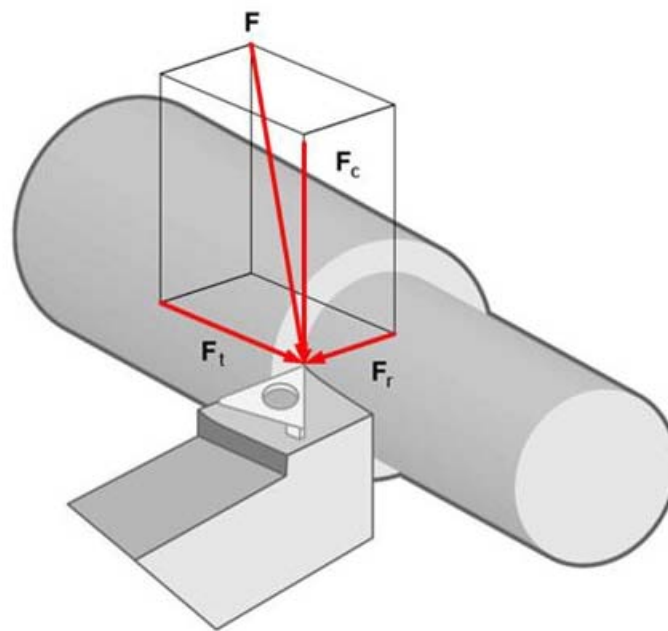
Forces acting in cutting tool during turning. Adapted from [22]
